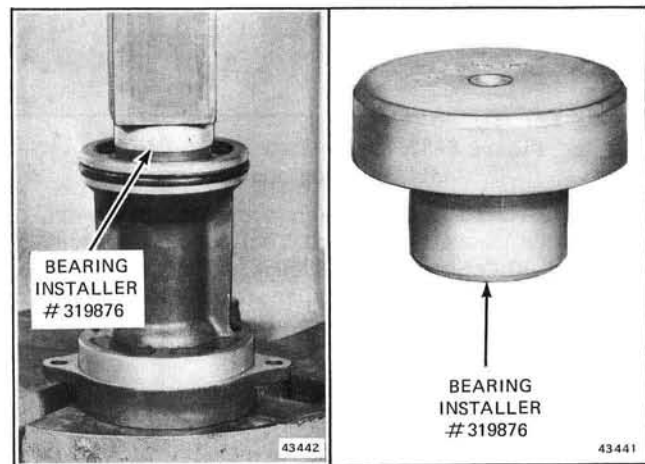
Installing Reverse Gear Bearing in Bearing Housing
